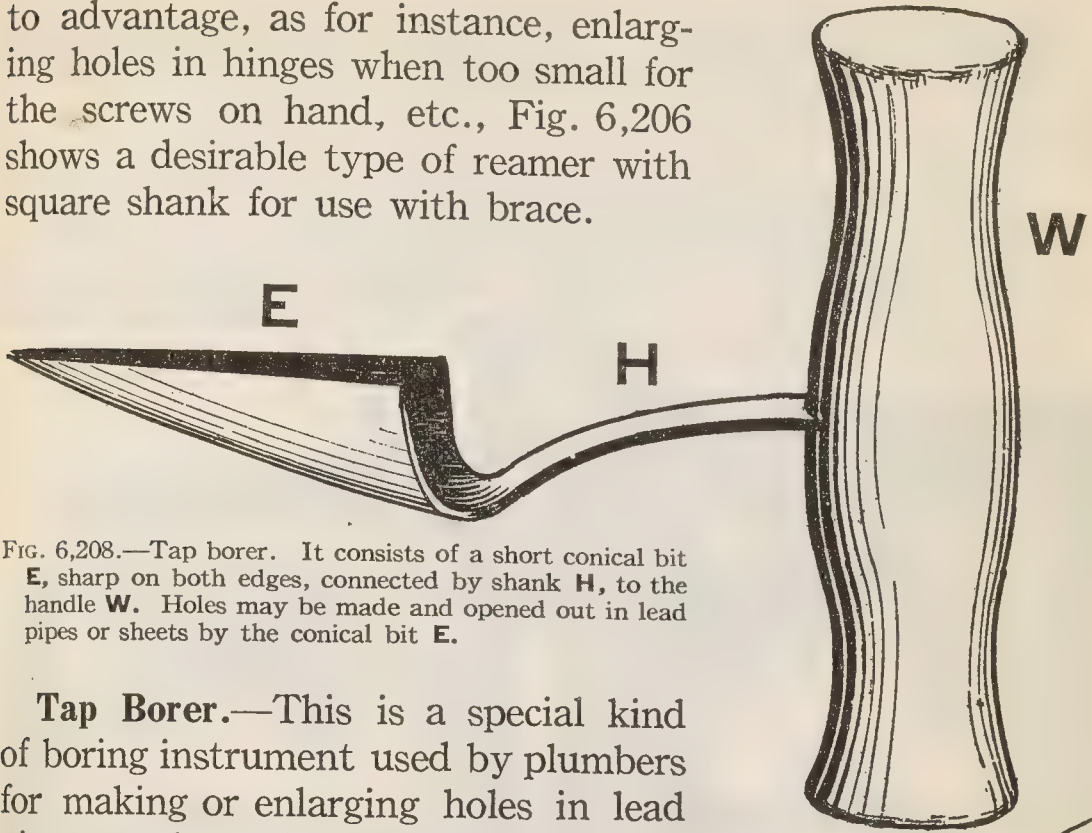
,208.—Tap borer. It consists of a short conical bit E, sharp on both edges, connected by shank H, to the handle W. Holes may be made and opened out in lead pipes or sheets by the conical bit E.
